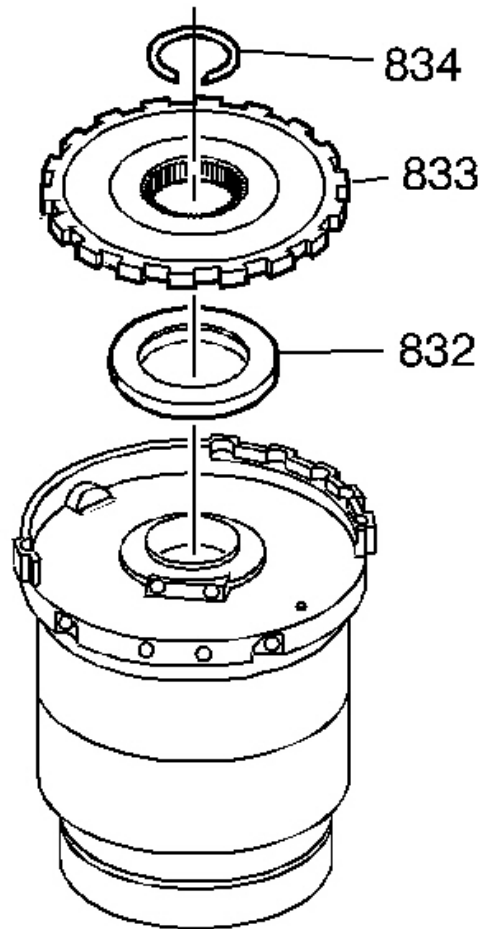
Parking Lock Gear And The Thrust Bearing And Snap Ring
